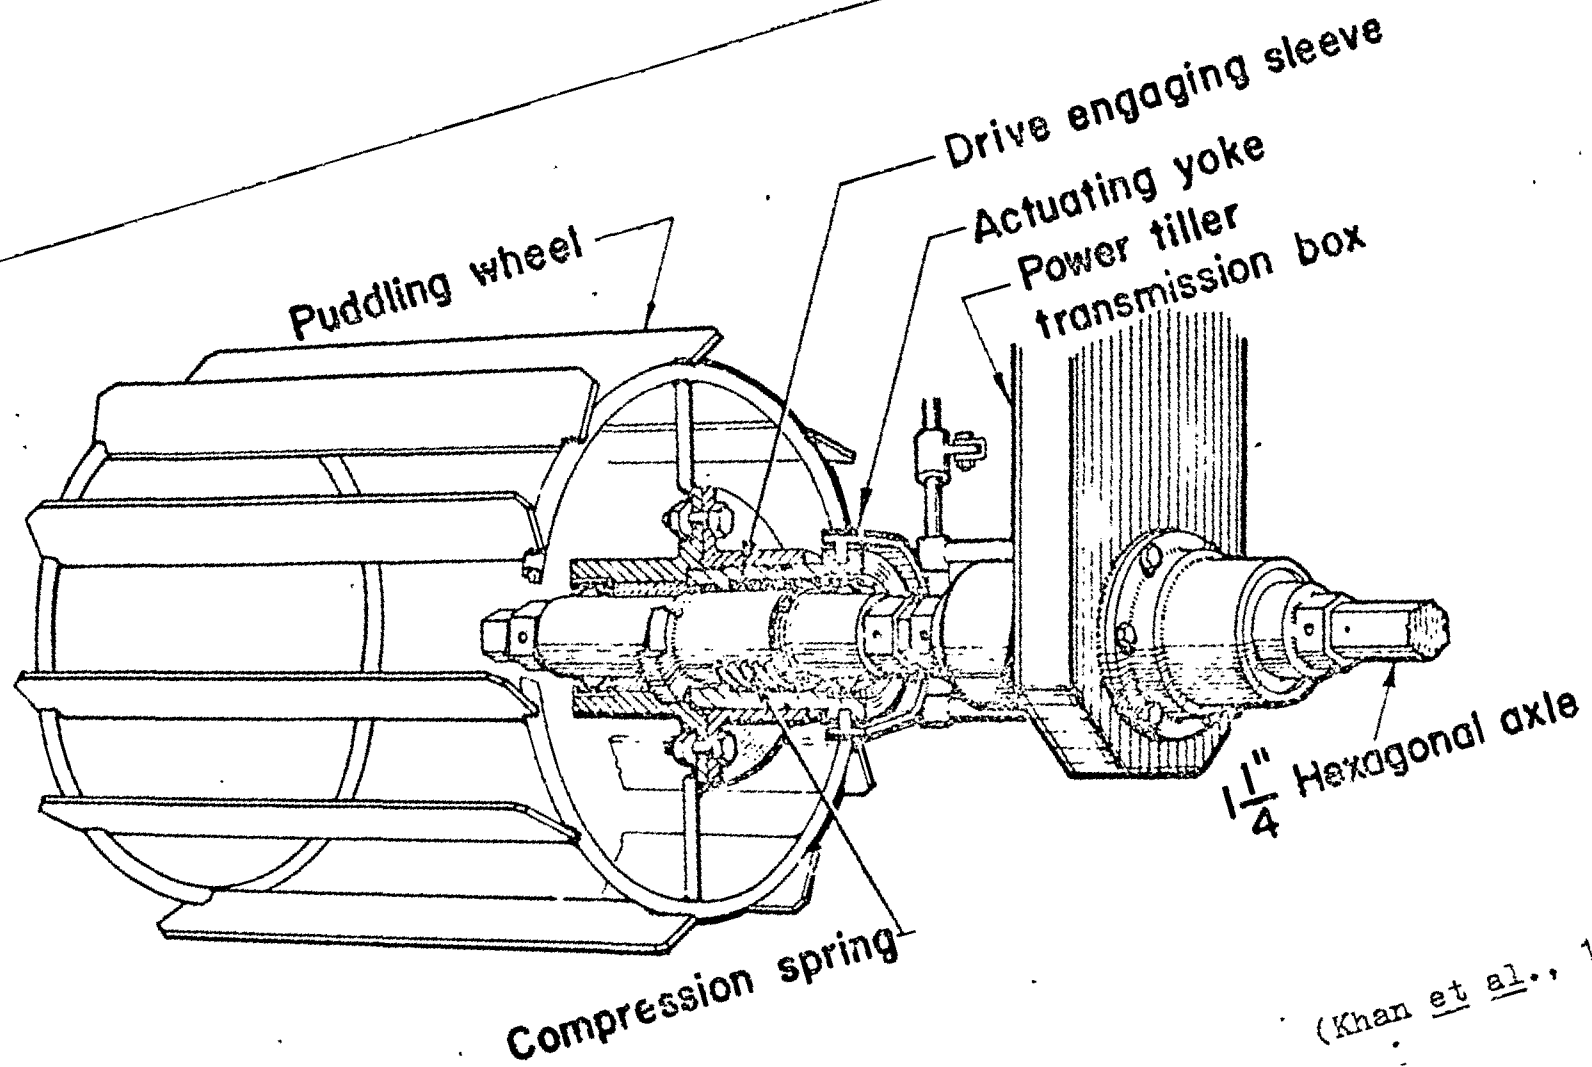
IRRI EXTERNALLY MOUNTED STEERING CLUTCH
